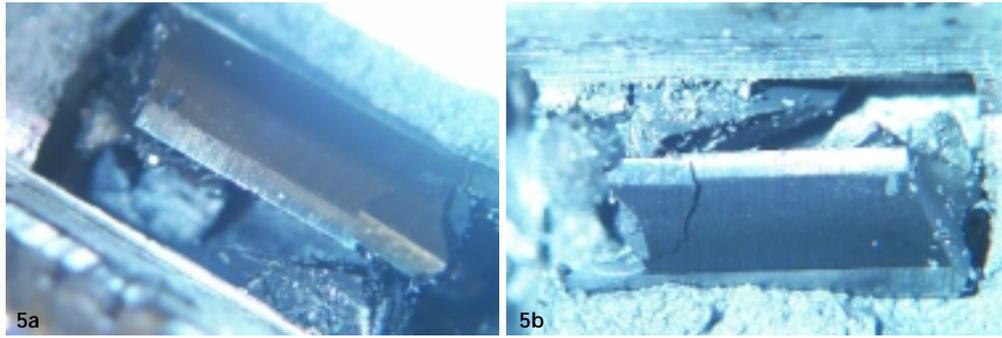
Excessive clearance between the starting bushing and drill tip can cause edge breakage.
